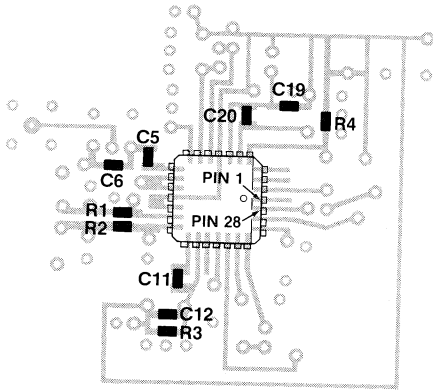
Surface mounted component overlay (track side) of demonstration board (1:1)
